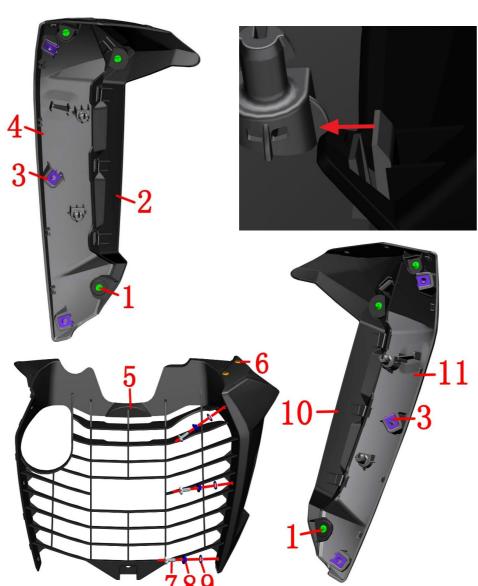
COOLING SYSTEM COMPONENT		Radiator covercomponent 2	CHK	40)
